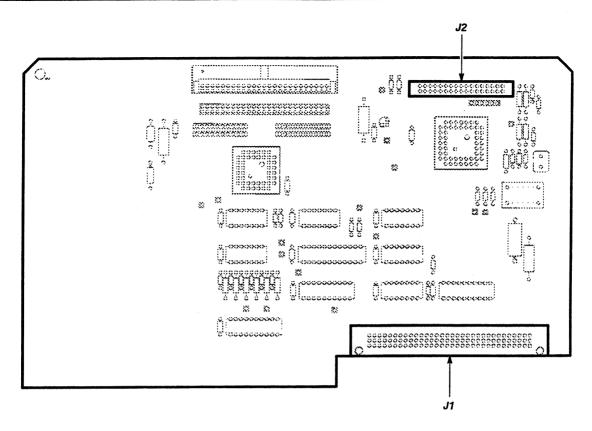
Removing/Replacing the A32 Disk Controller Board
